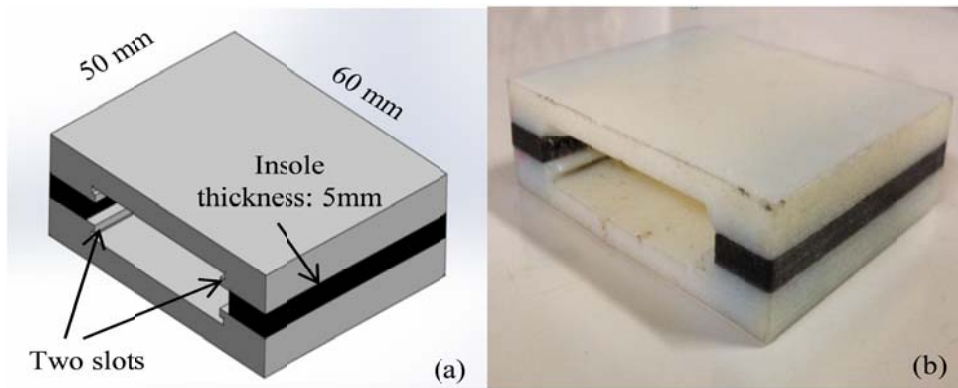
Antenna pressure sensor package: (a) SolidWorks model (b) fabricated sensor package
